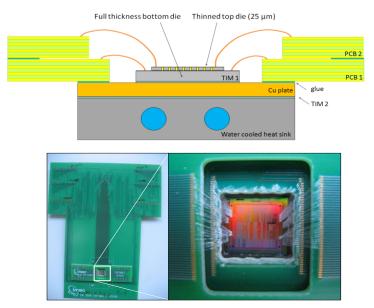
(Top) Schematic cross-section of the test vehicle. (Bottom) Picture of the 2-level PCB - Detail of the cavity in the PCB containing the die stack to reveal the wirebond connections from the PCB to the top and bottom die of the 3D stack.
